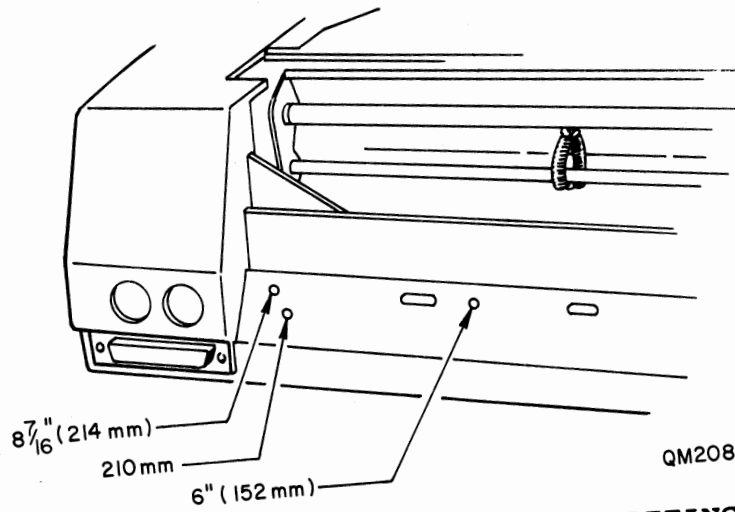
PAPER ROLL WIDTH SETTINGS
